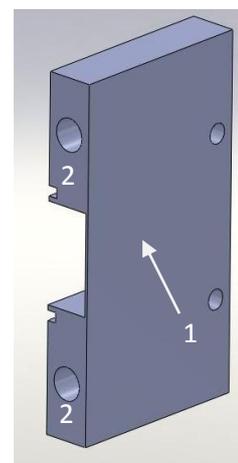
Cross section view of the back plate: 1: Beam strike area. 2: Heat element holes.
